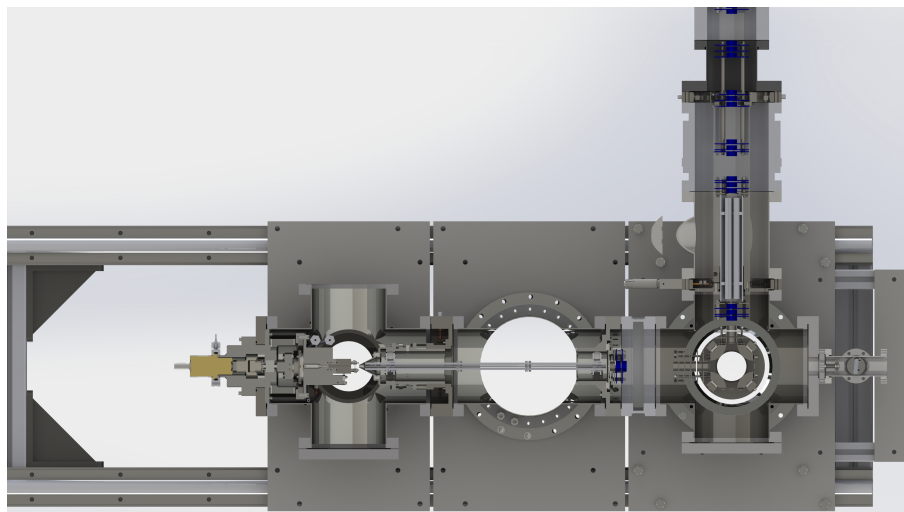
Rendering of the cluster source assembly flange with the gas input into the vacuum. The piezo valve is mounted on top of the cluster source and sealed by a Viton ring.
